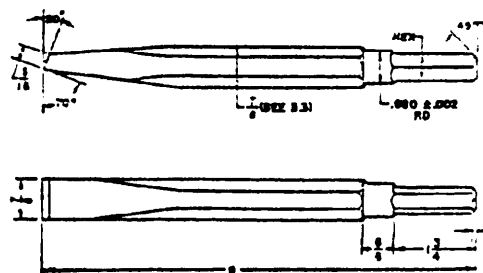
Type XX, chisel, tight rivet-cutting.
